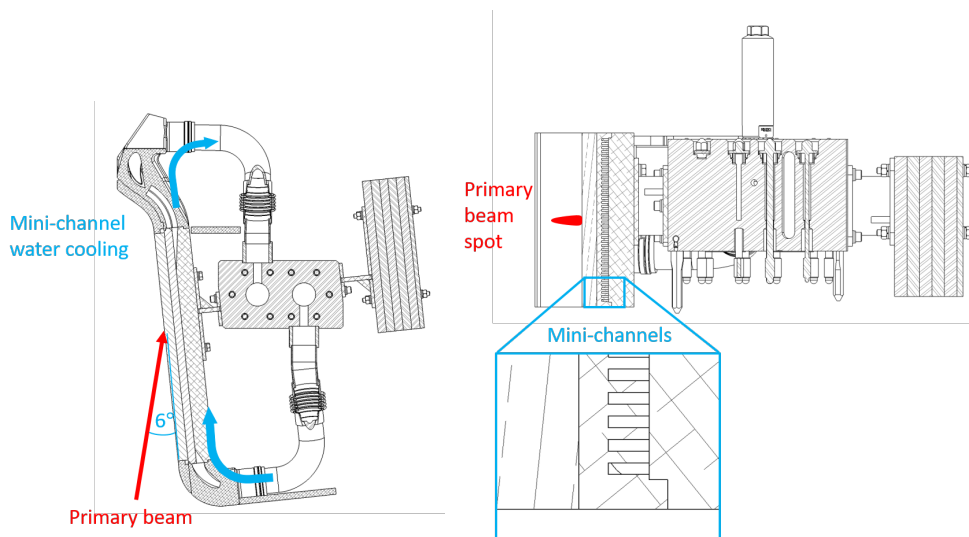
Intermediate mini-channel beam dump top (left) and front (right) sectional views. Inset: detail of the channels.
